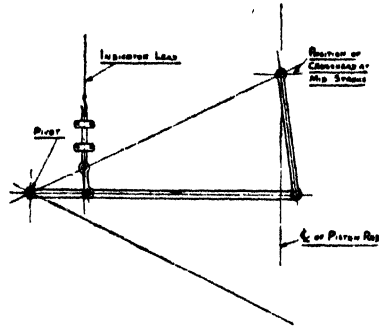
CORRECT REDUCING GEAR OF LEVER TYPE
